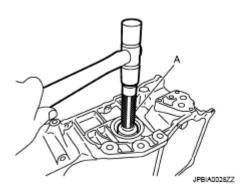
Removing Axle Pipe From Oil Pan (Upper) Using Drift Courtesy of NISSAN MOTOR CO., U.S.A.
